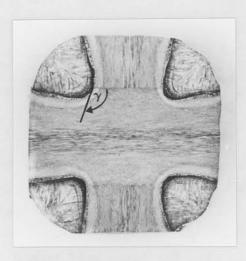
Section through the fillet welds of a MIG welded FLNFT test specimen.
